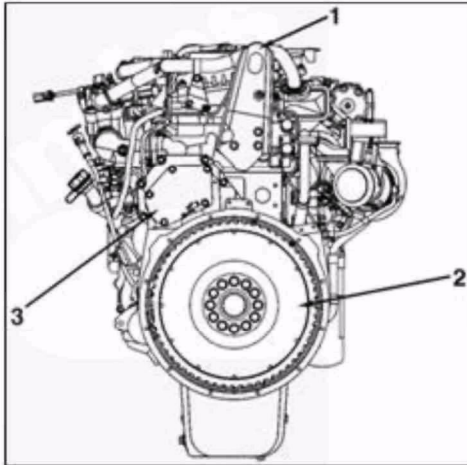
Whole Engine Right Side View Diesel & CNG
